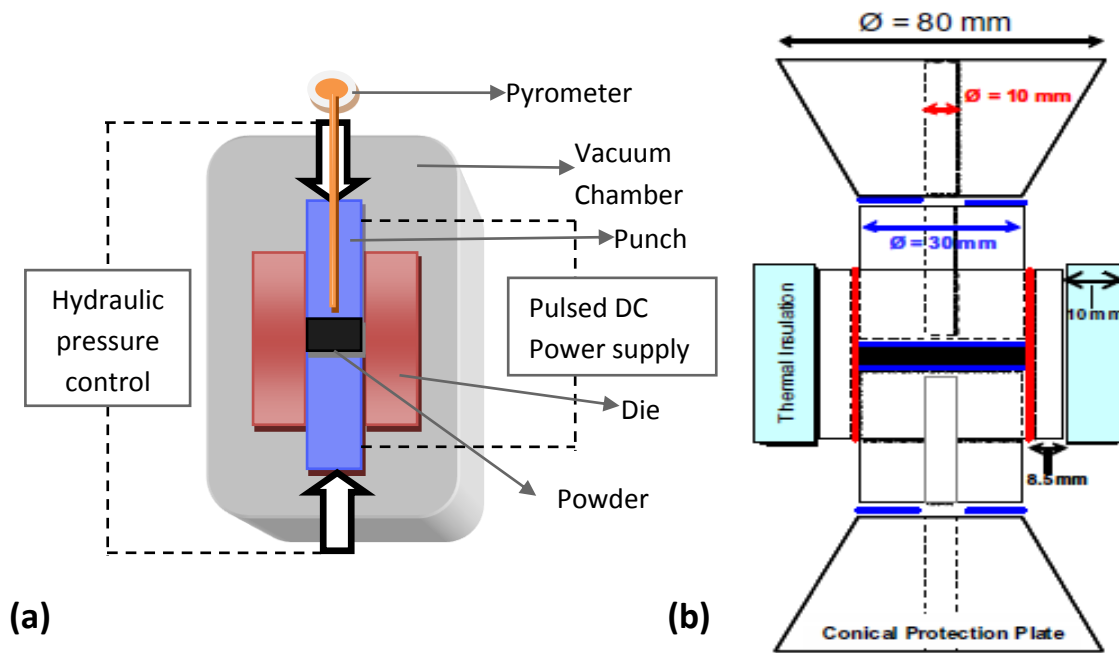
(a) Schematic of the SPS system; (b) Diagram showing the parts and dimensions of the die-punch assembly
